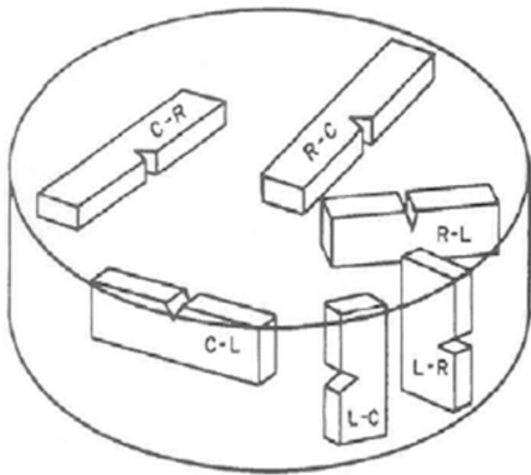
Fracture Toughness and Crack Direction II, (MIL-HDBK-5J).
